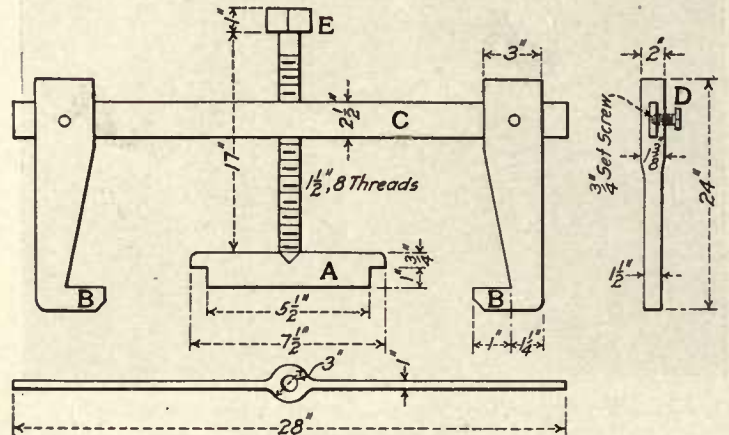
Clamp for Exhaust Nozzle When Testing Steam Pipes.
